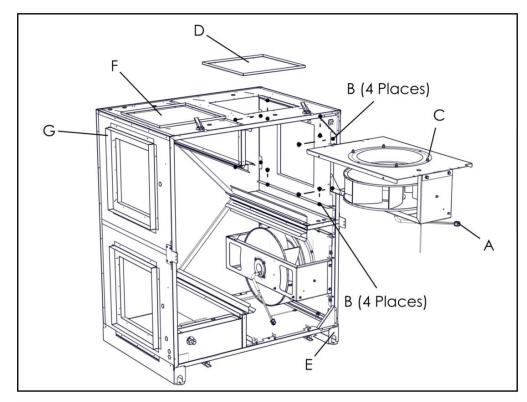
EXAMPLE OF CONVERTING OPENINGS
